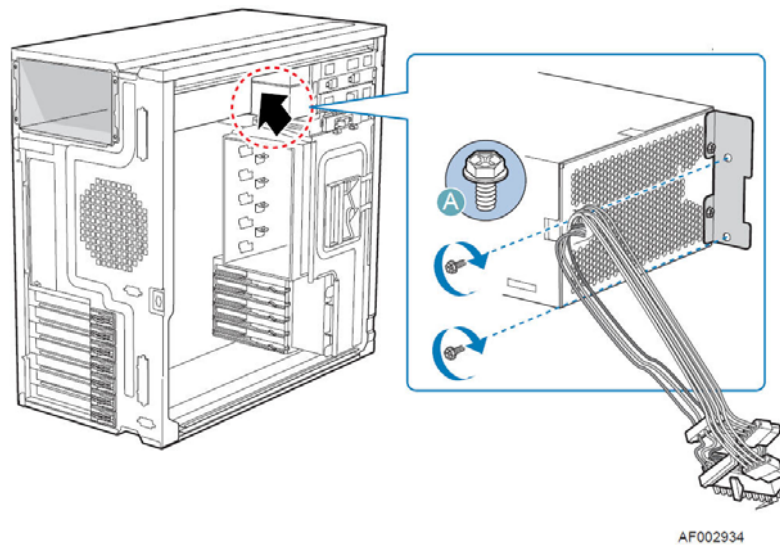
Securing Hot Swap Power Supply Cage to Inside of Chassis
